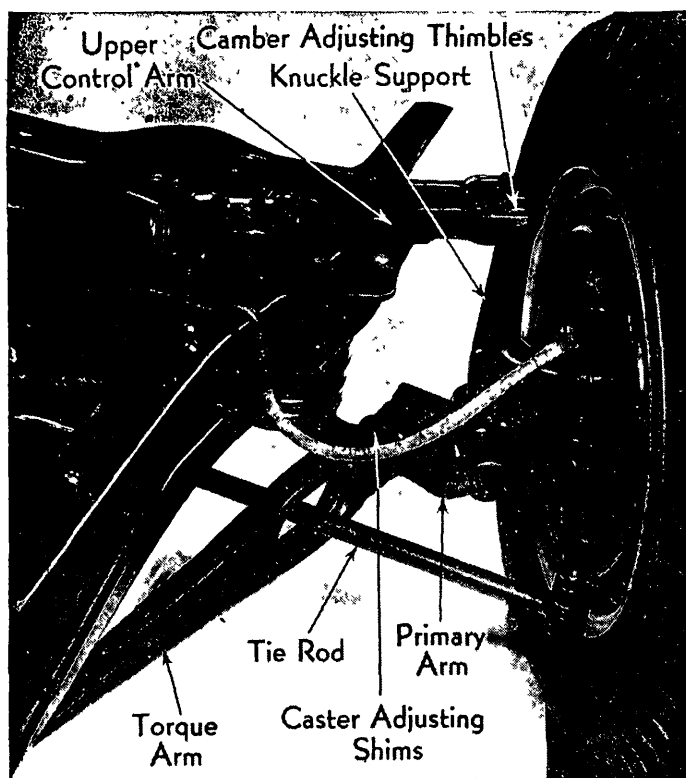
Camber and caster adjustment, 1935-42 cars with knuckle action (except Clippers). V12s have shims at base of yoke on upper control arm for adjusting camber
